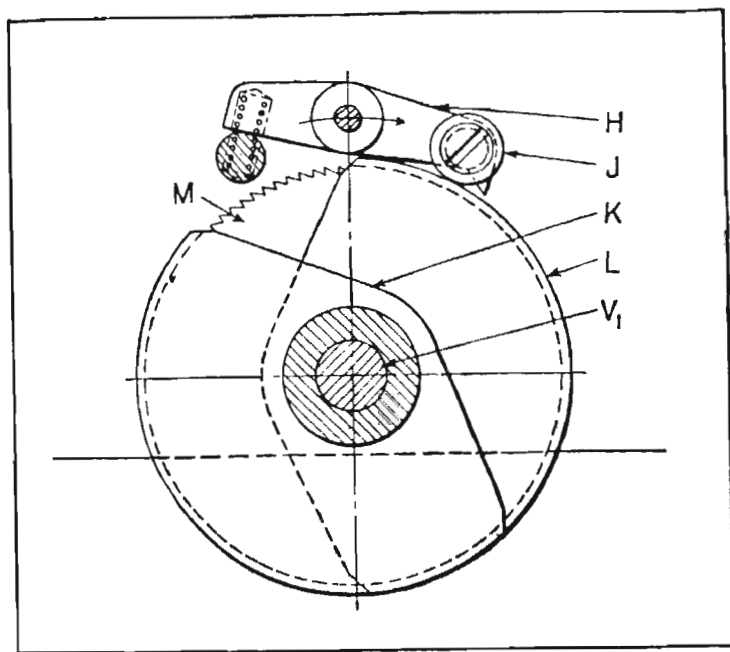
Another View of Section Z-Z Showing Positions of Cams *K* and *L* for a 12-Micron Setting.
